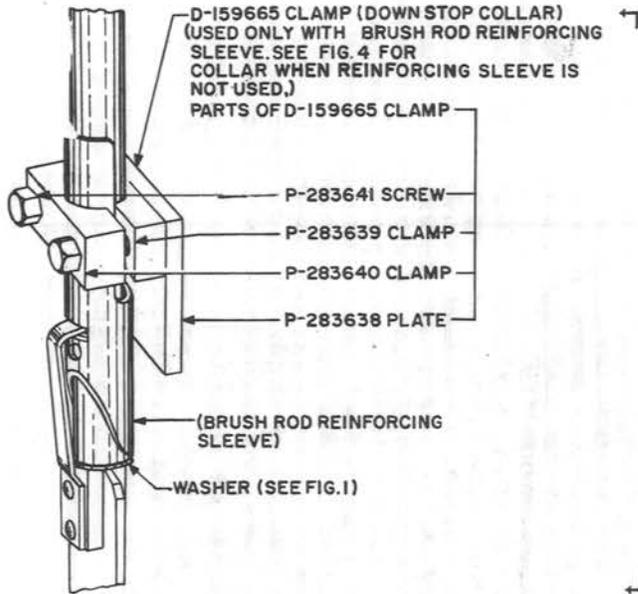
Downstop Collar Used With Brush Rod Reinforcing Sleeve
